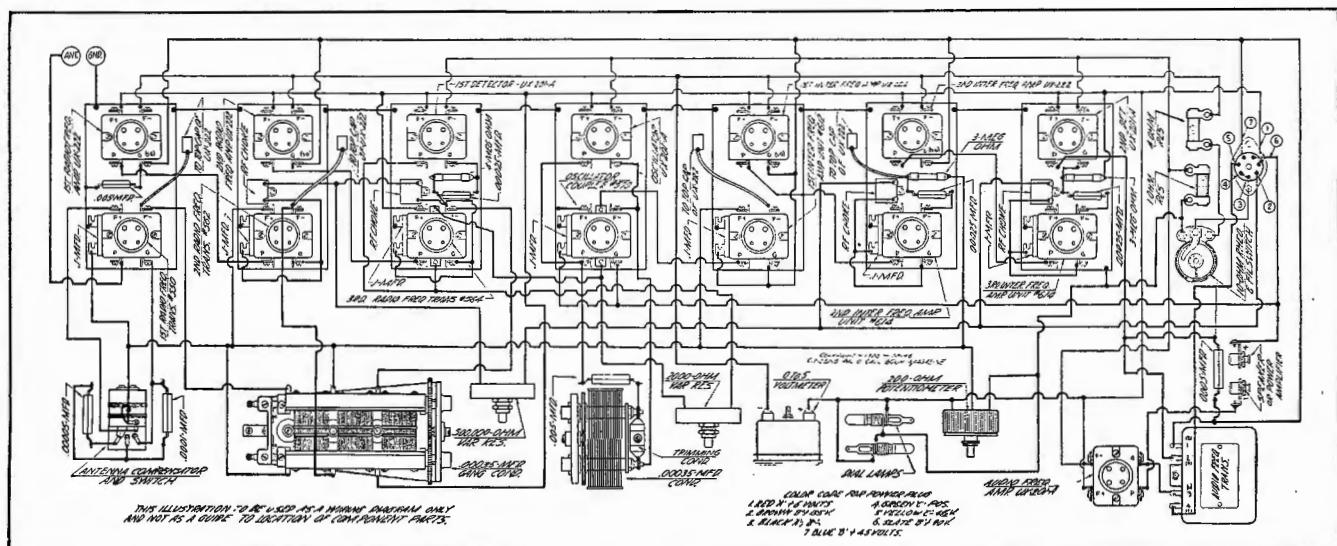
All of the wiring for this receiver should be done from the graphic illustration which is printed above, while the experienced set builder may be able to use the schematic which is printed in Figure 3. Nevertheless, a great deal of time may be saved by following the diagram above, since it shows the method of making all connections
